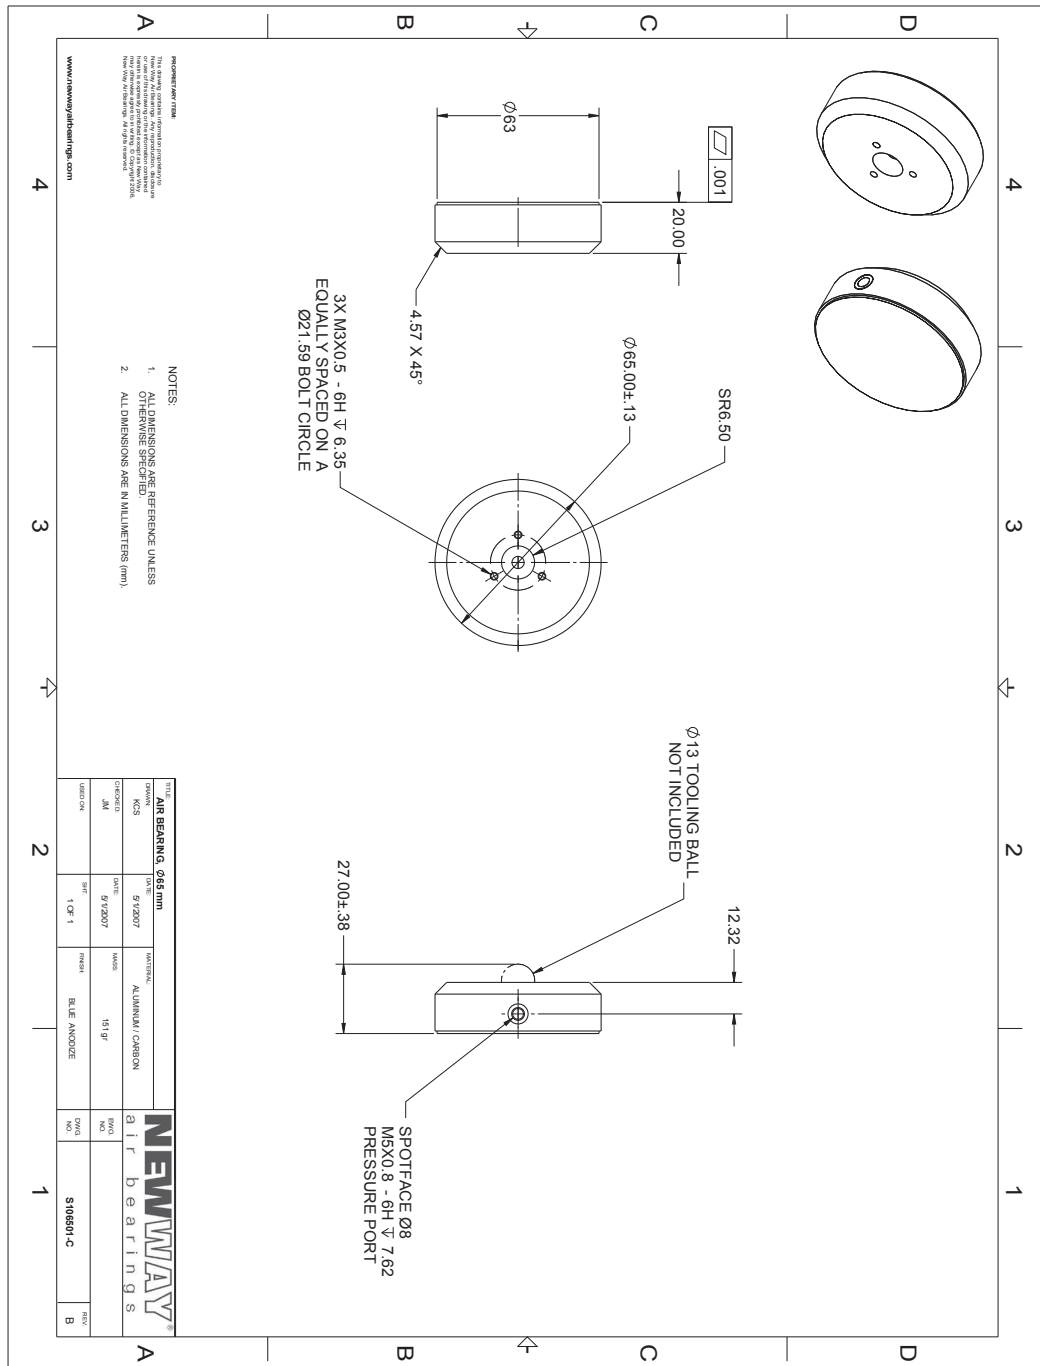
New Way air bearing 65 mm diameter engineering drawing (Source: <http://www.newwayairbearings.com>)
